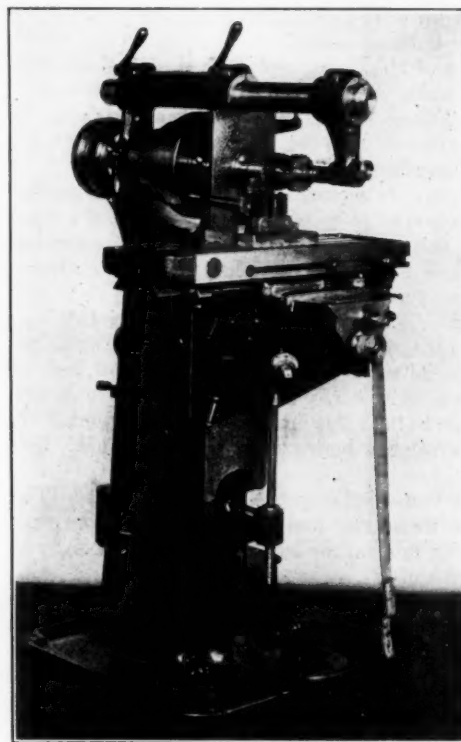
NO. 0 PLAIN MILLING MACHINE SUITED TO HIGH-SPEED PRODUCTION
